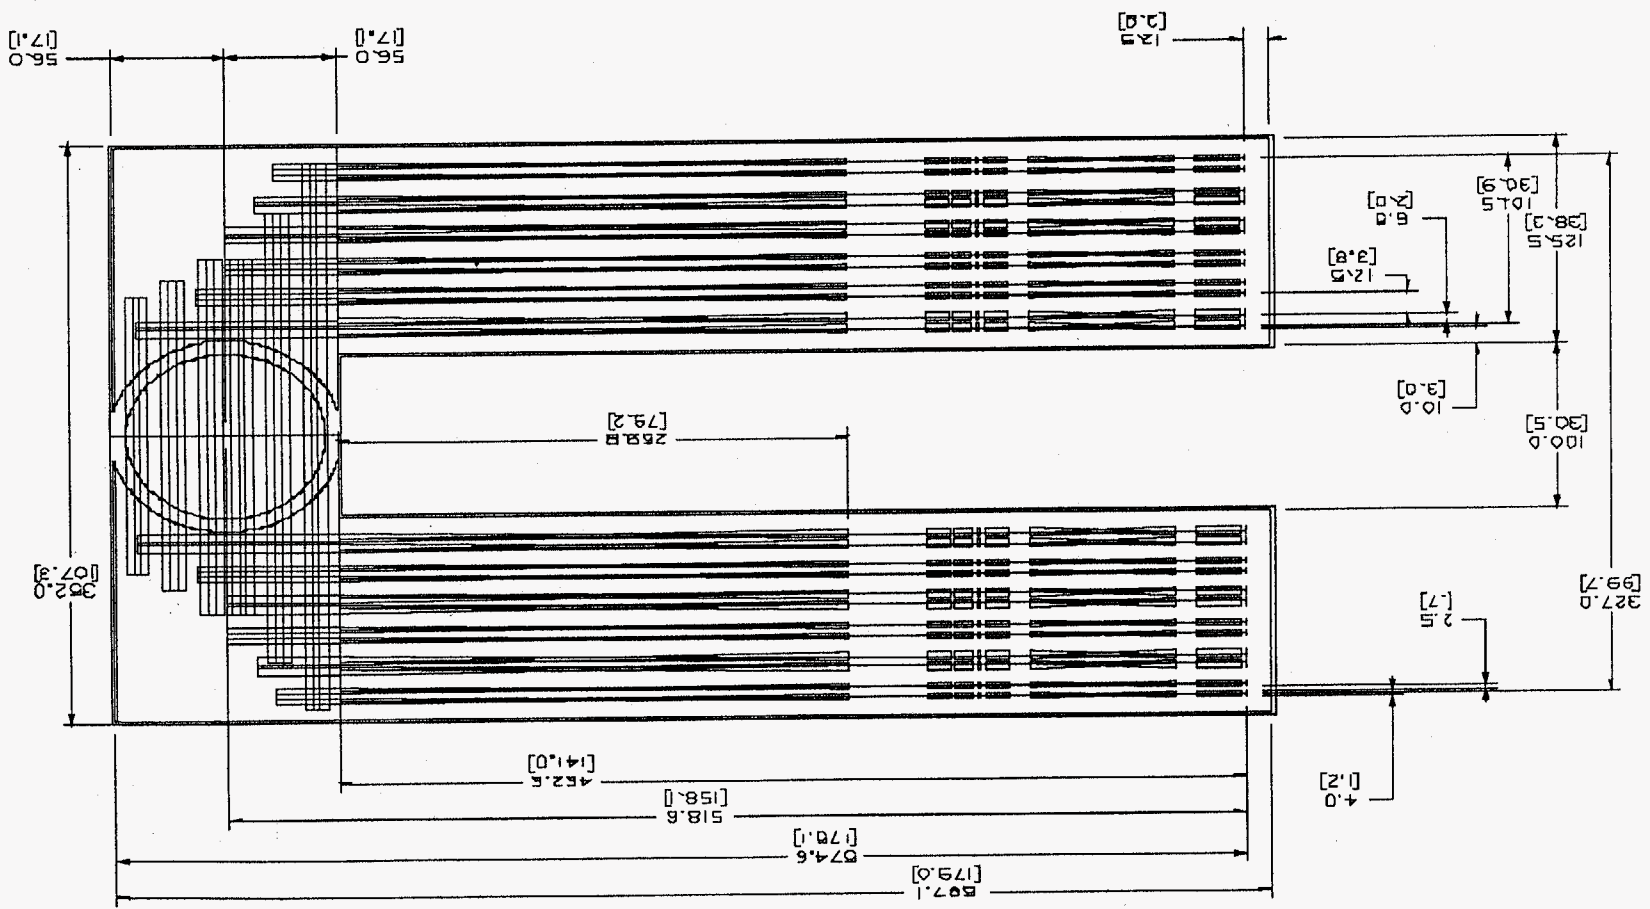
Amp1/Amp2 elevation view with top loading amplifiers
